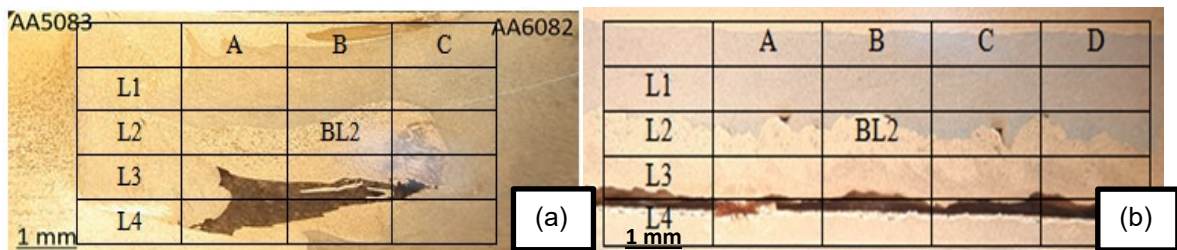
Macrographs, (a) FS welded transverse and (b) FS welded longitudinal samples.
